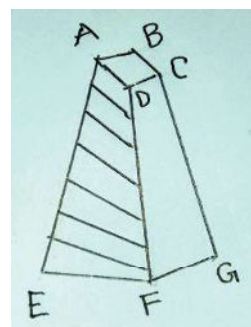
Perspective view of a saw tooth of taker-in wire.
